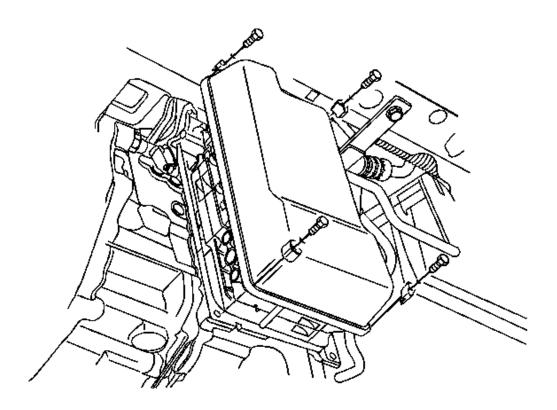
Manual Shift Shaft and Seal Replacement Courtesy of GENERAL MOTORS CORP.
